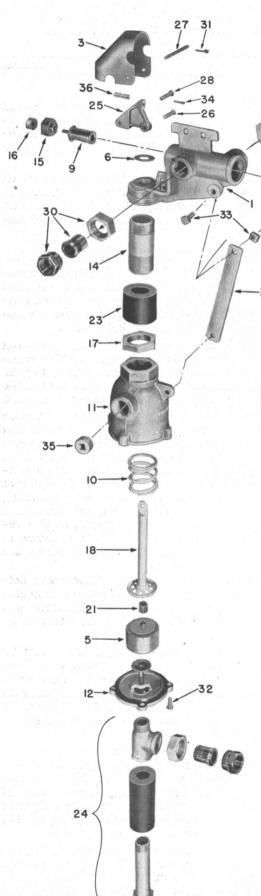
Exploded View of No. 960 Hot Water Regulator
